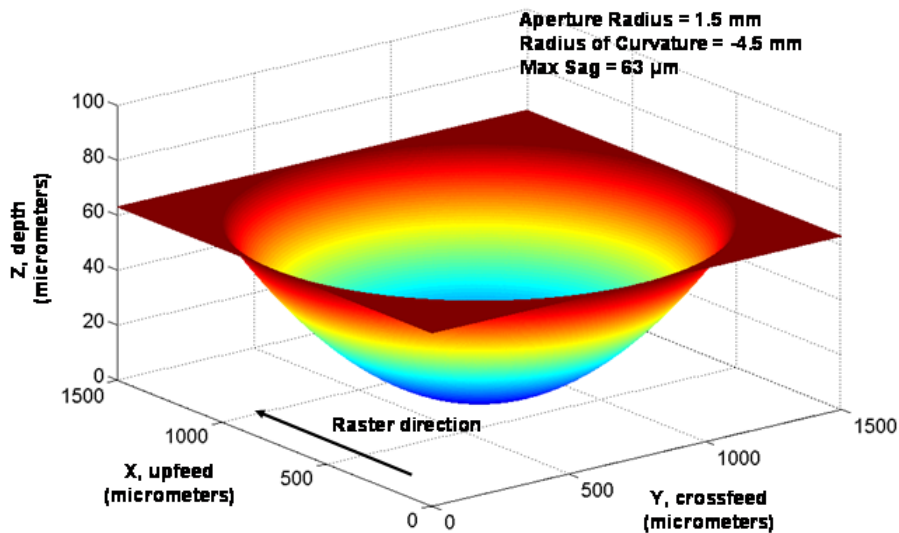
Design dimensions of spherical reflector made by the Ultramill
